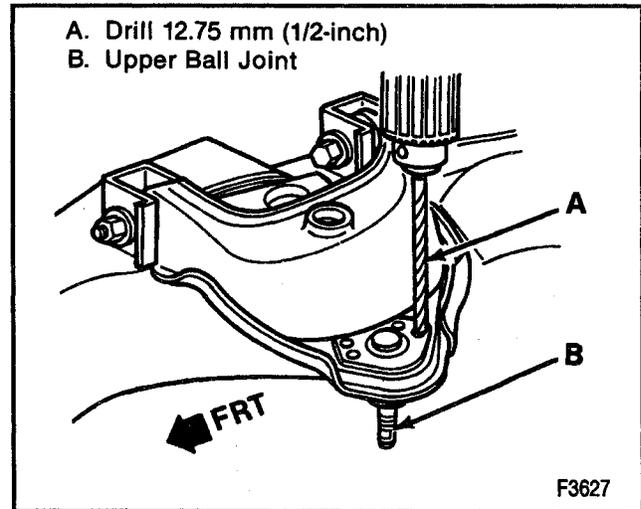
Drilling the Upper Ball Joint Rivet Heads
